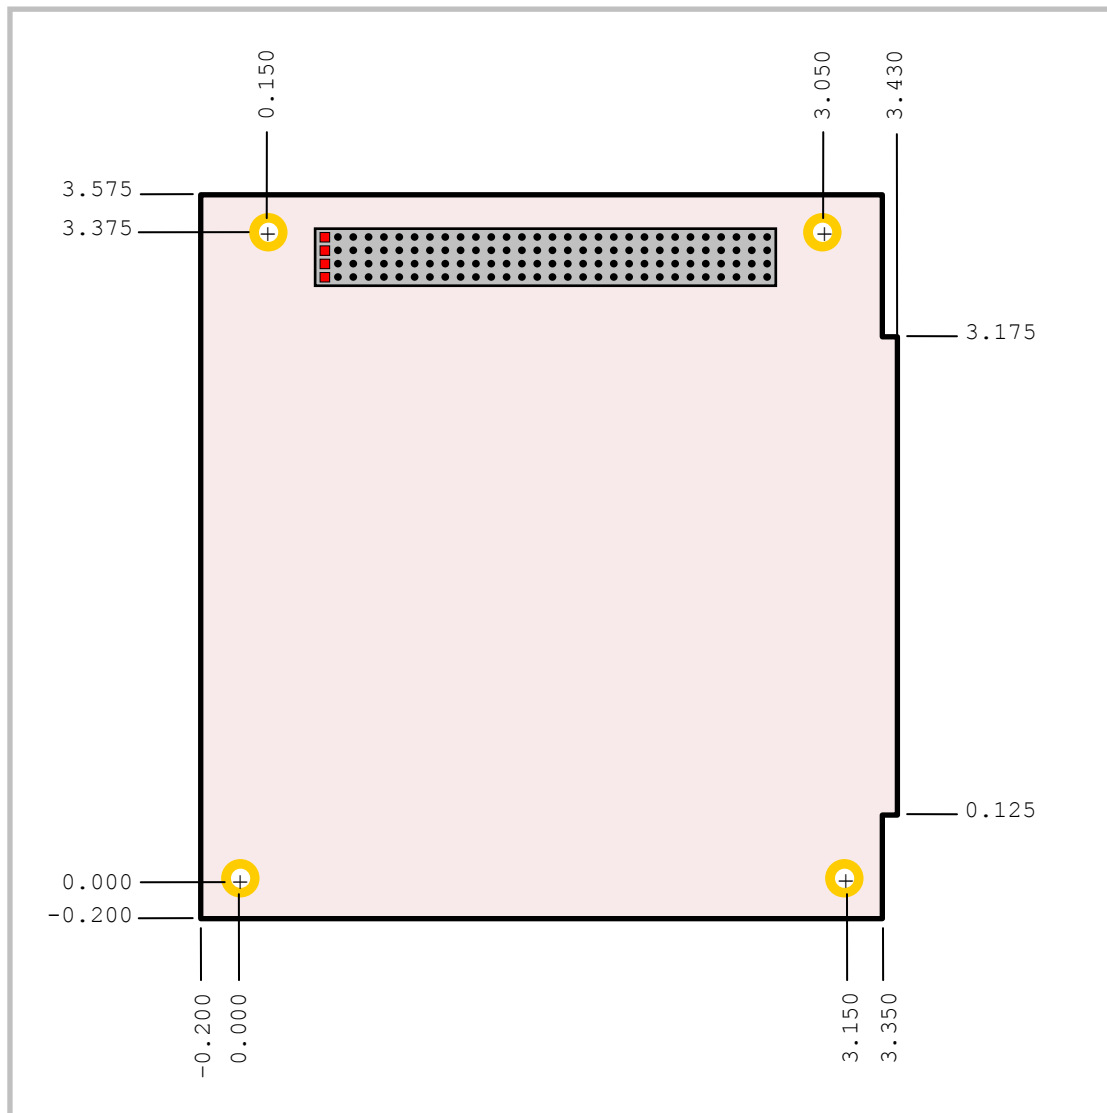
VL-EPM-35 Bottom Board Dimensions and Mounting Holes (Top View)
